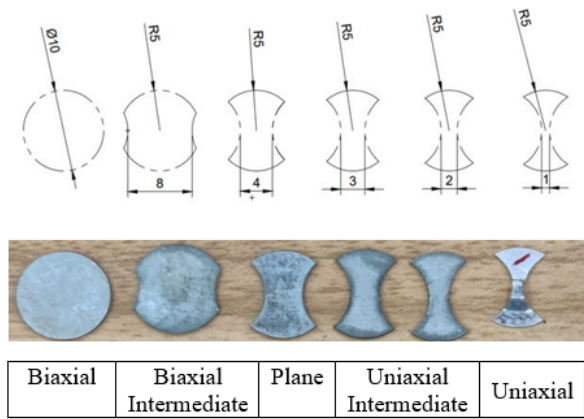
Specimen preparation: ASTM E2218-14 standard
